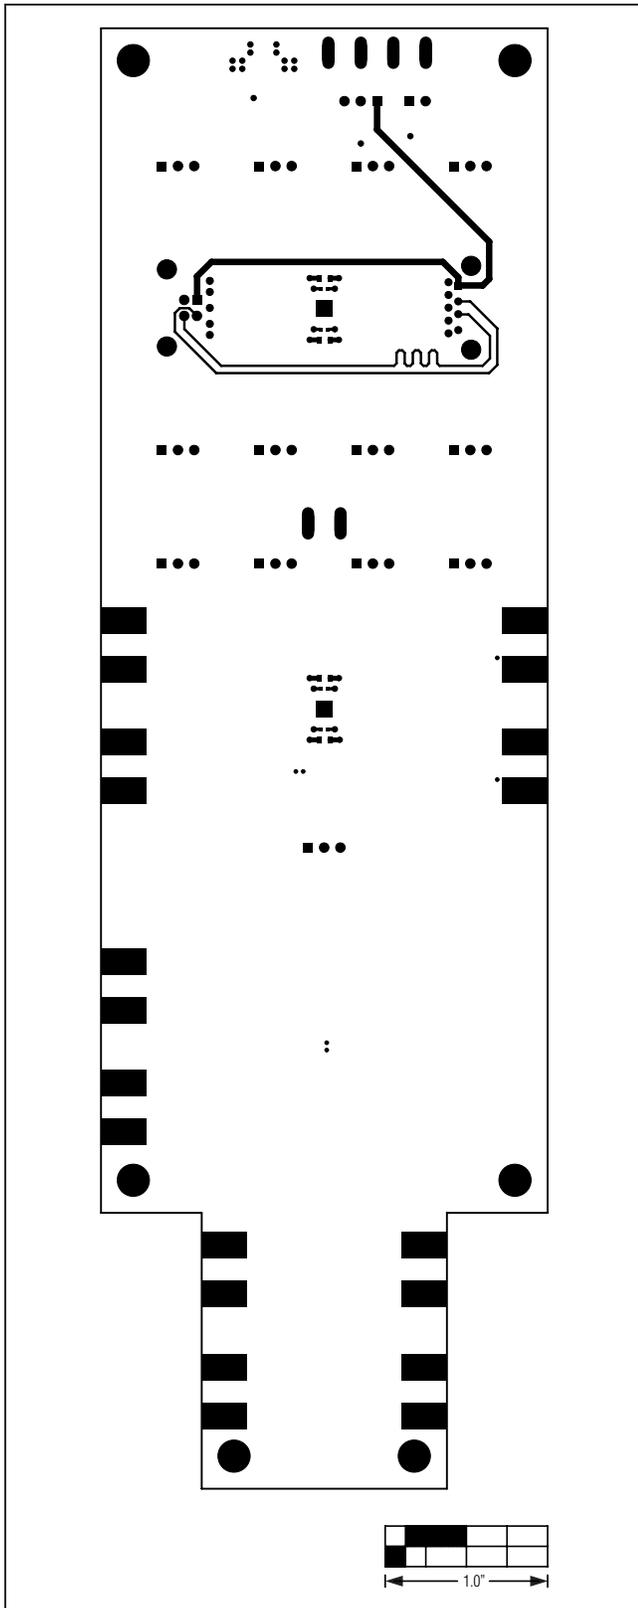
MAX14972 EV Kit PCB Layout—Solder Side
